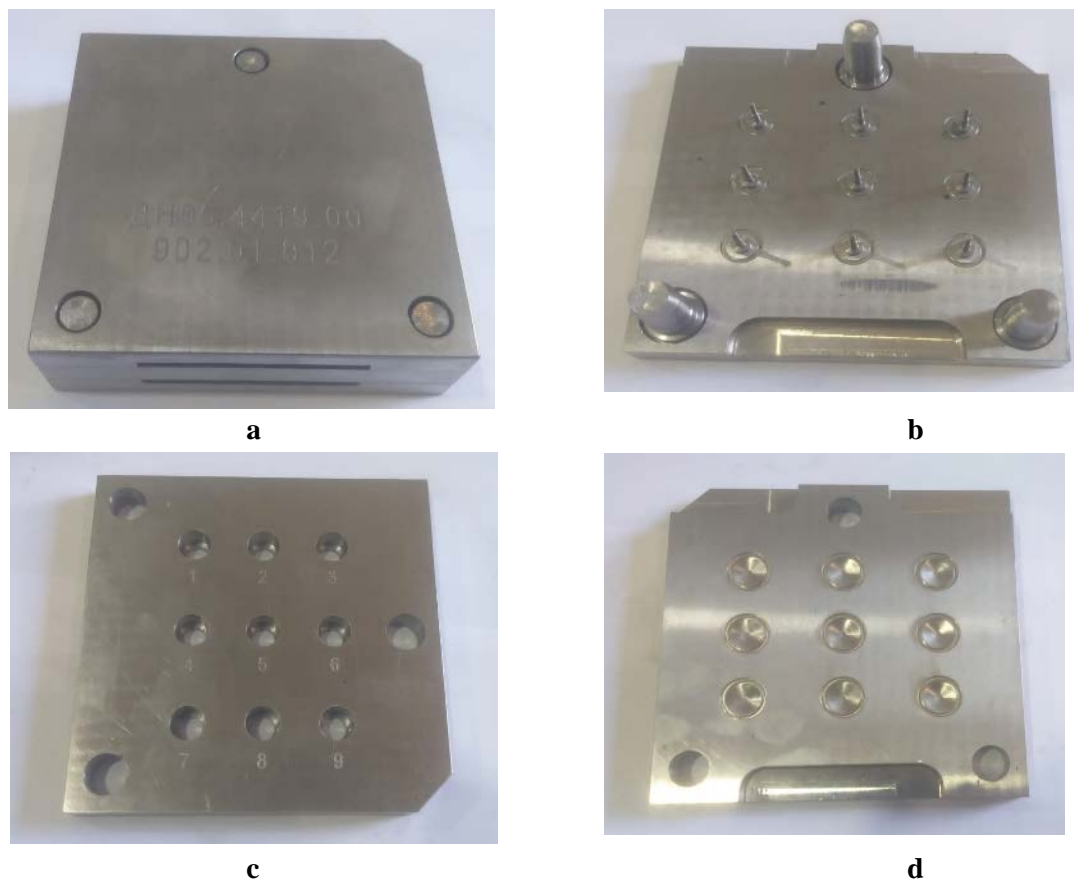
General view of the press tooling: a- appearance of the complete tooling, b- punch, c- press spacer, d- die.
